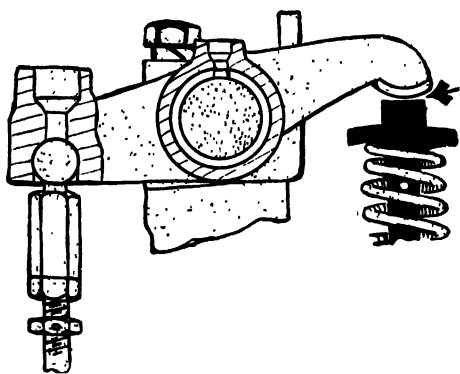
Adjustment of valve stem clearance on valve-in-head motor. (Clearance is measured at point indicated by arrow.)
